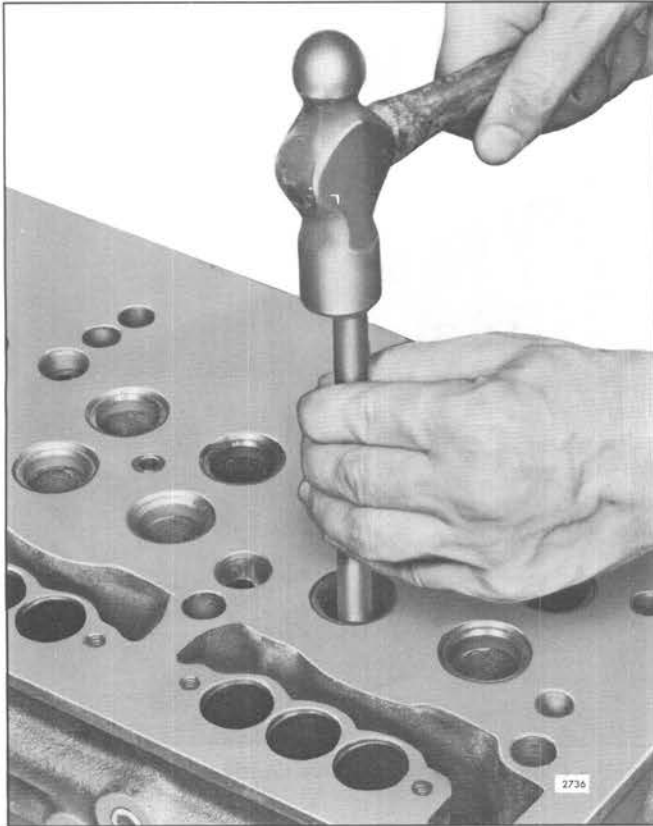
Removing Exhaust Valve Guide with Tool J 6569
